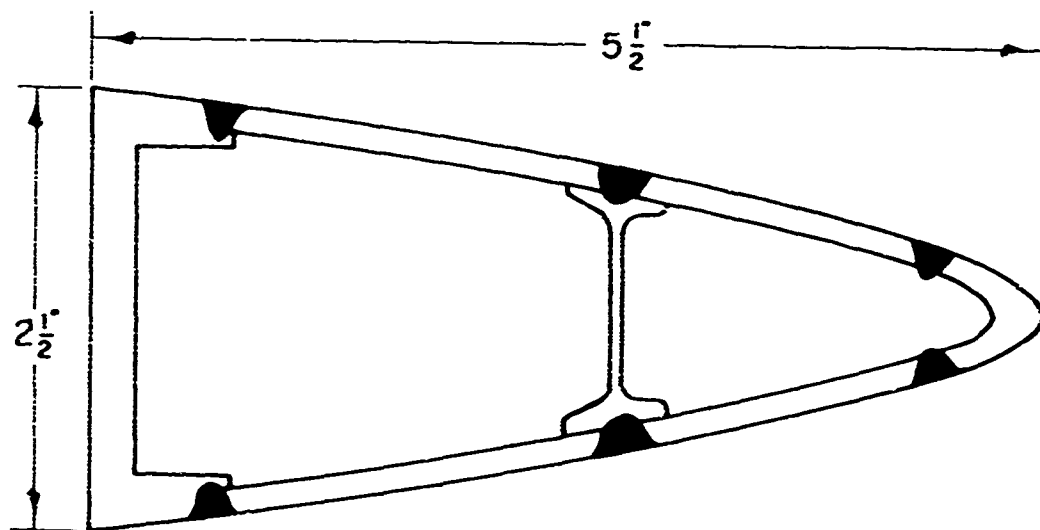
TYPICAL CROSS SECTION OF WELDED TITANIUM LEADING EDGE (REF. 53)
